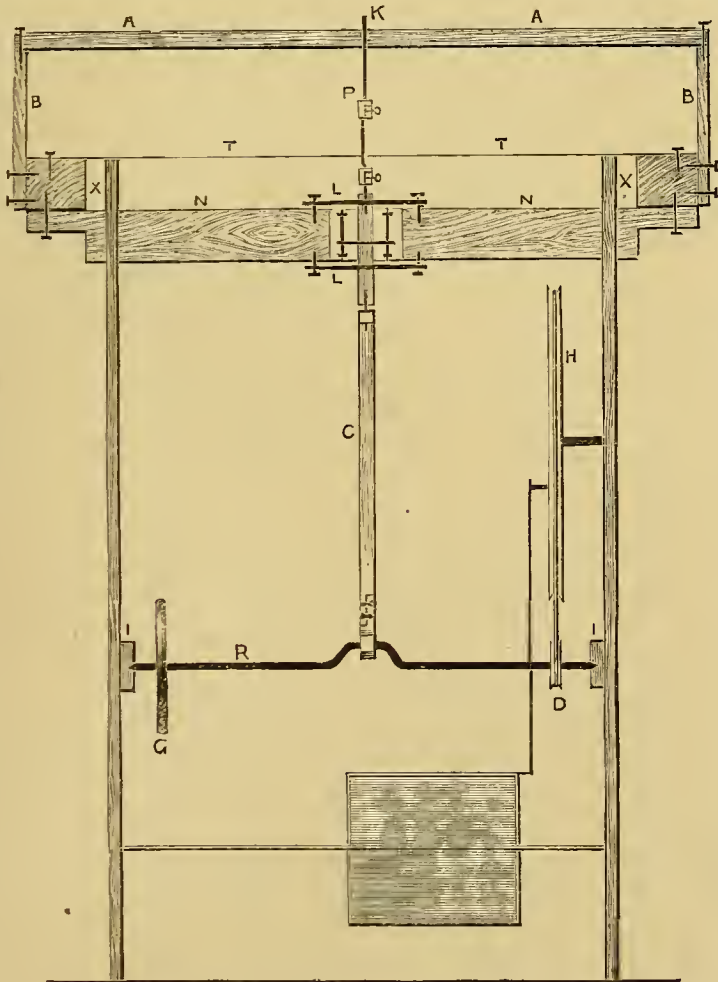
FRONT ELEVATION OF FRETSAW MACHINE MADE FROM SEWING MACHINE.
